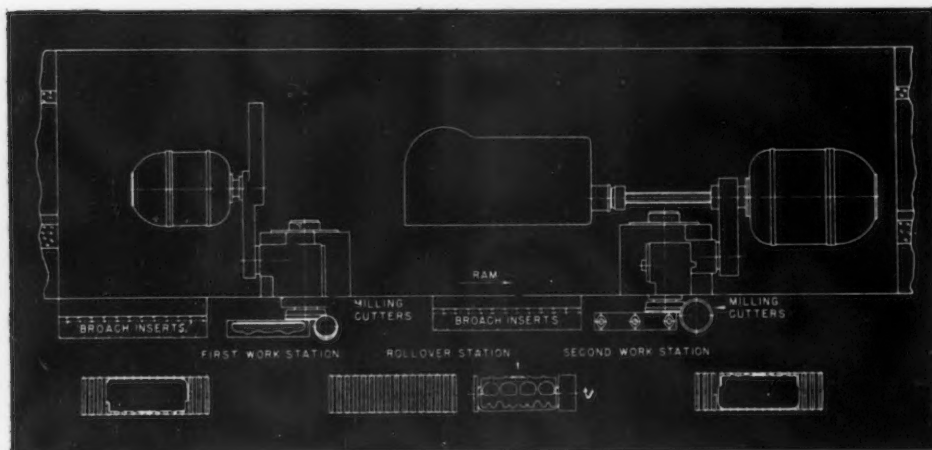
Relative positions of the ram, milling cutters, broaching tools, and work holding fixtures are shown here.
